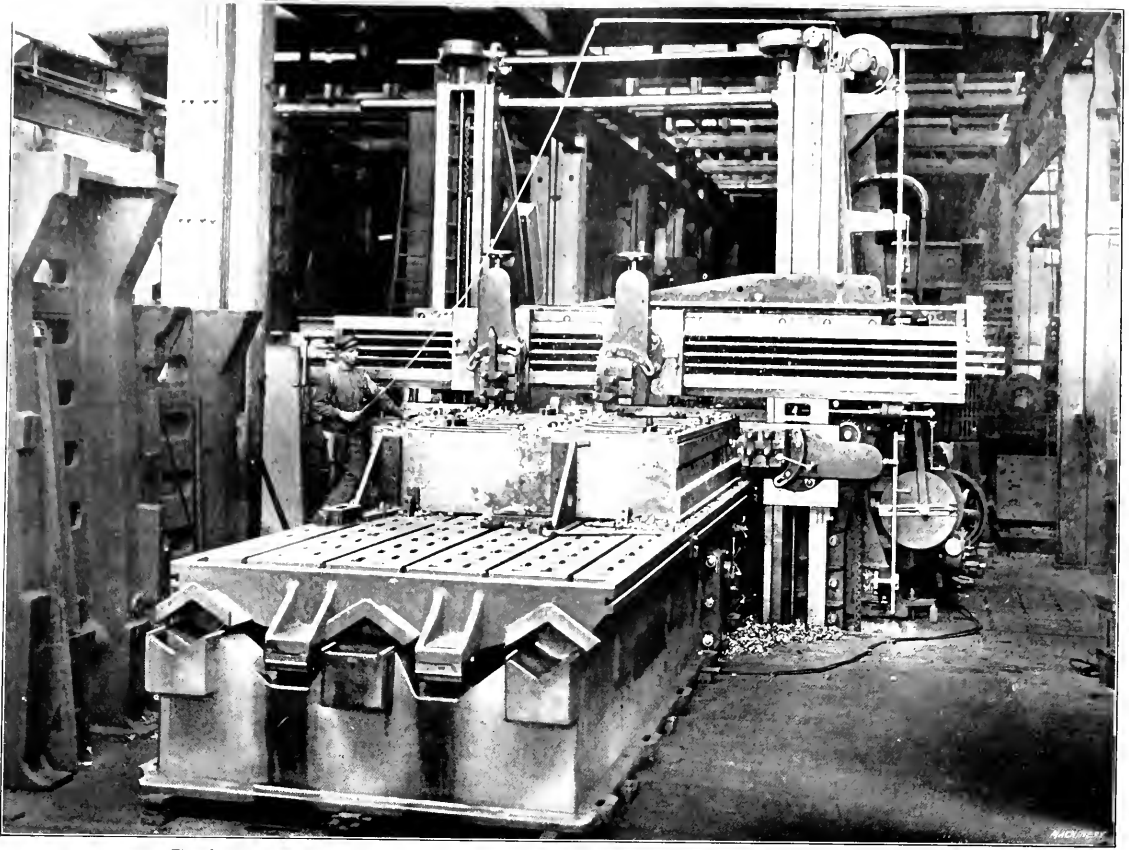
Machine with Auxiliary Housing in Place, converting it into the Equivalent of a Standard Planer
